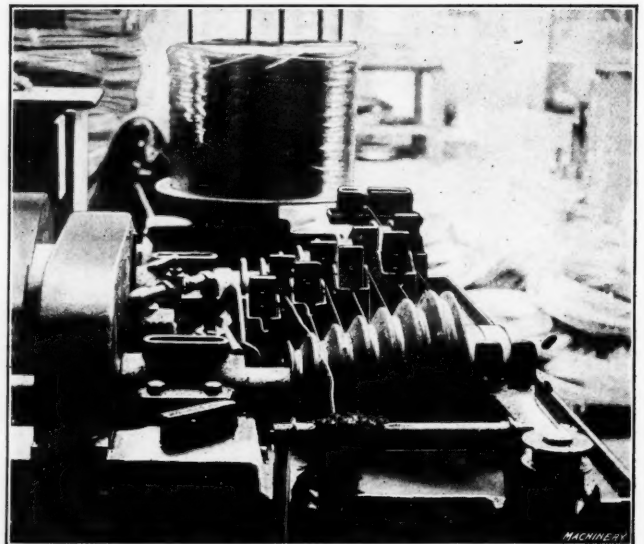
Another Type of Wire Drawing Machine used for Copper and Brass Wire
